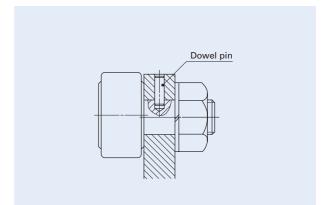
Mounting example of Solid Eccentric Stud Type Cam Follower
